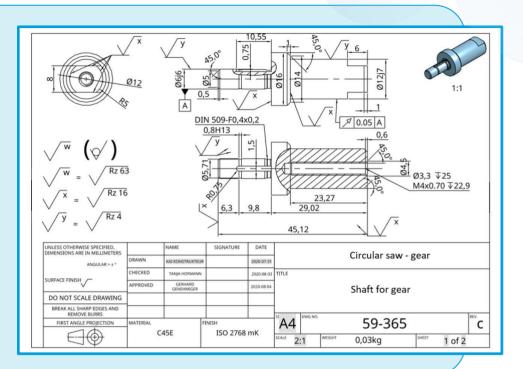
Shaft depicted in a technical drawing. The 2D presentation of a rather simple geometry impedes the readibility.
